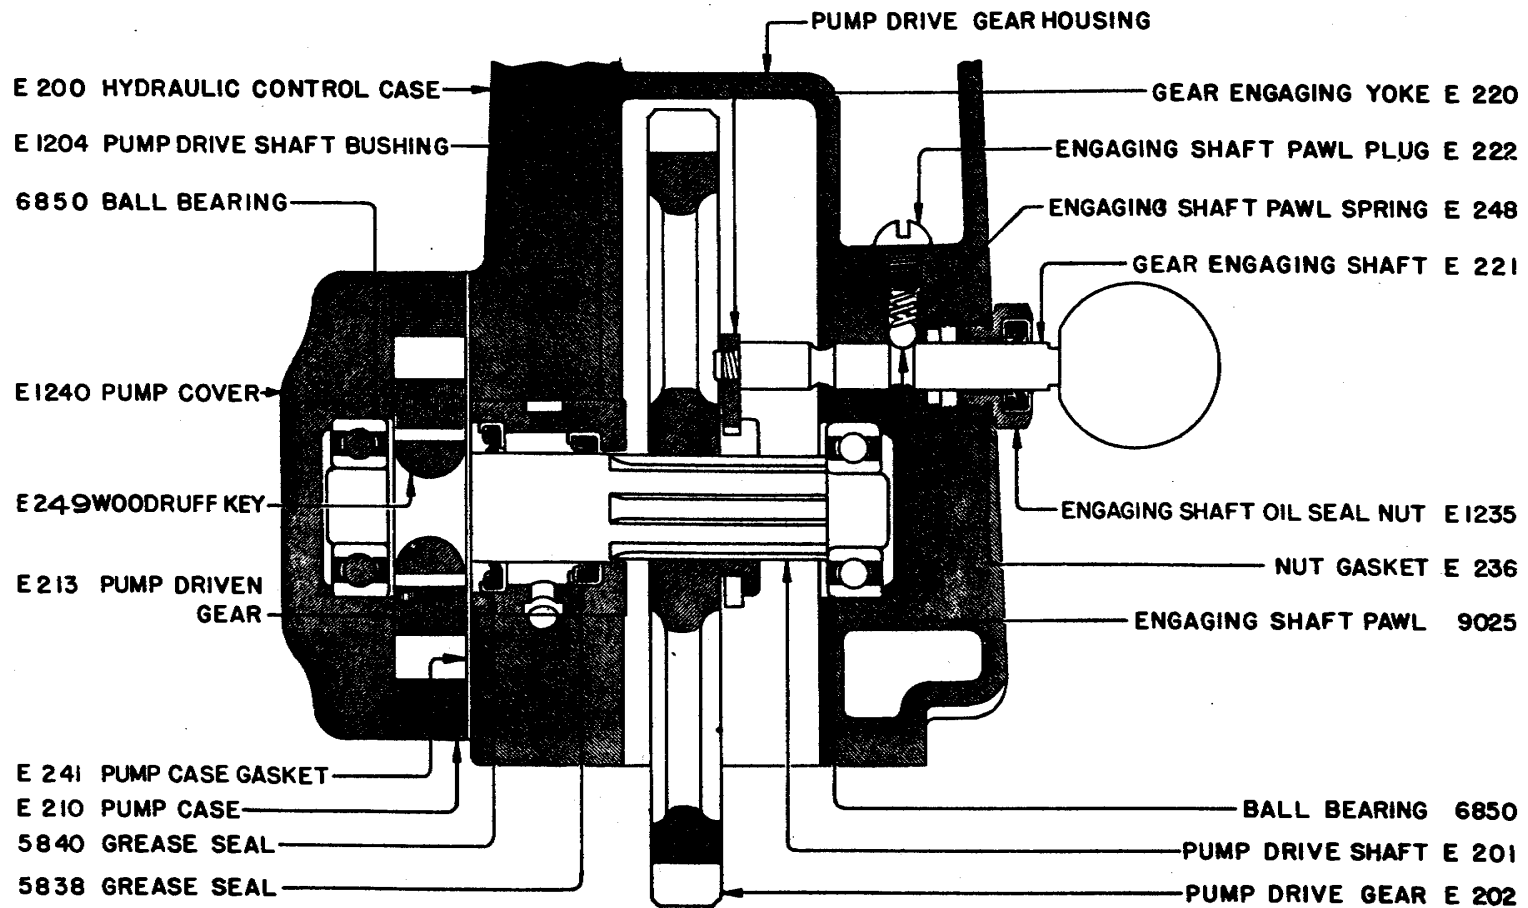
HYDRAULIC CONTROL PUMP ASSEMBLY
